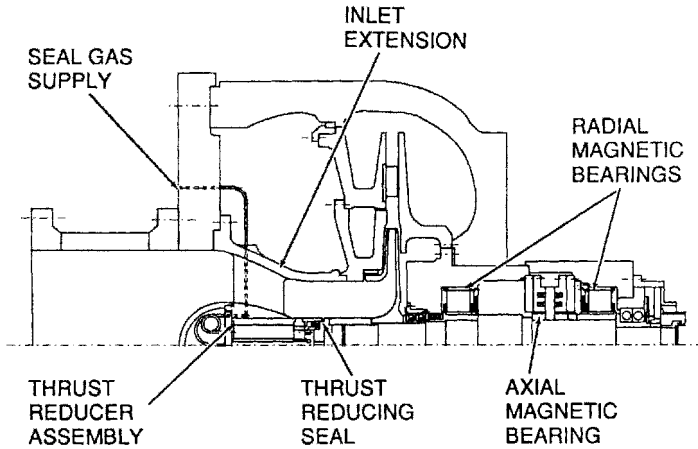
Axial inlet thrust reducer. (*Revolve Technologies, Calgary, Alberta, Canada*)
